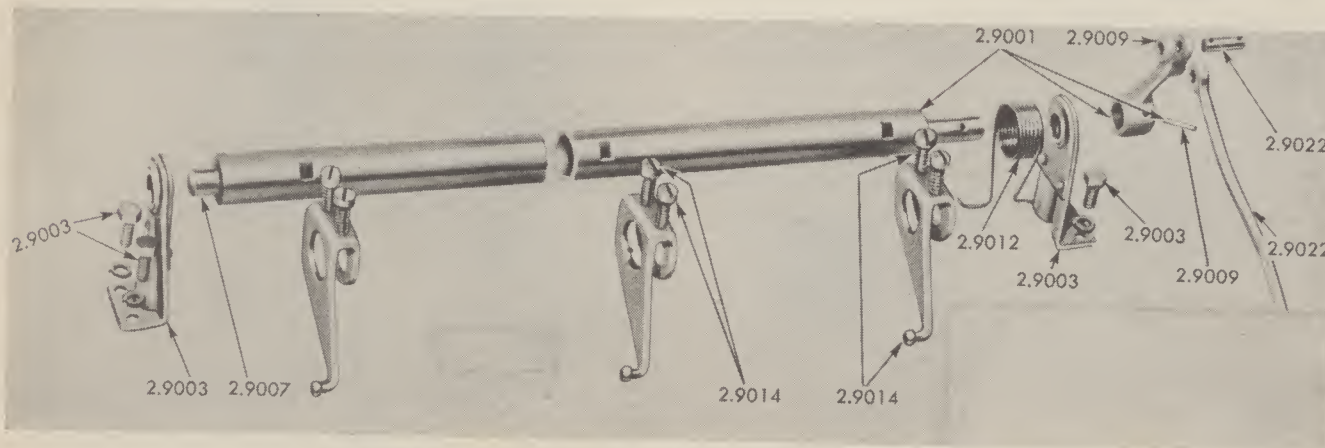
B—Injector rack control tube and control tube levers assembly.
